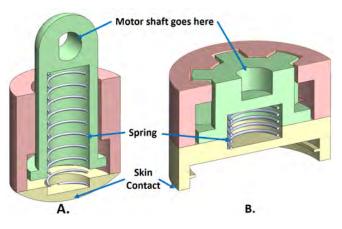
Cross sections of the spring-loaded tactors for (A) the rocker module and (B) the twister module.
